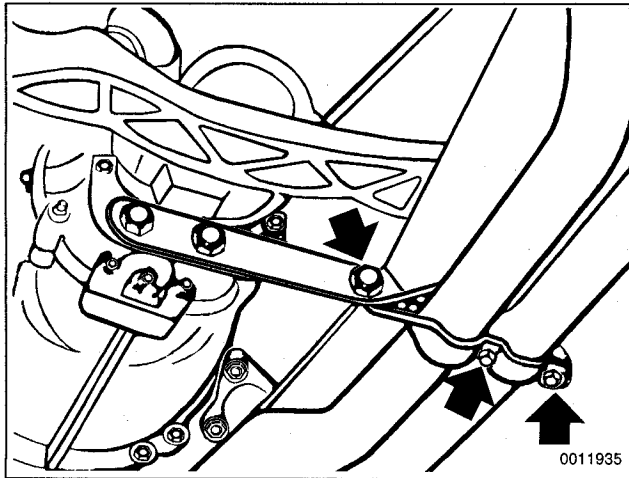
Exhaust system support bracket on 6-cylinder engine. Remove bolts (arrows) to separate from exhaust pipe.
